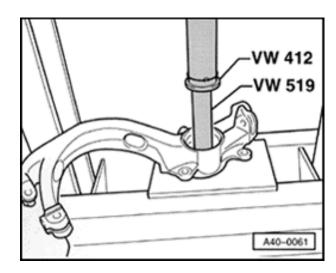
Pressing wheel bearing out of wheel bearing housing with 75 mm diameter
